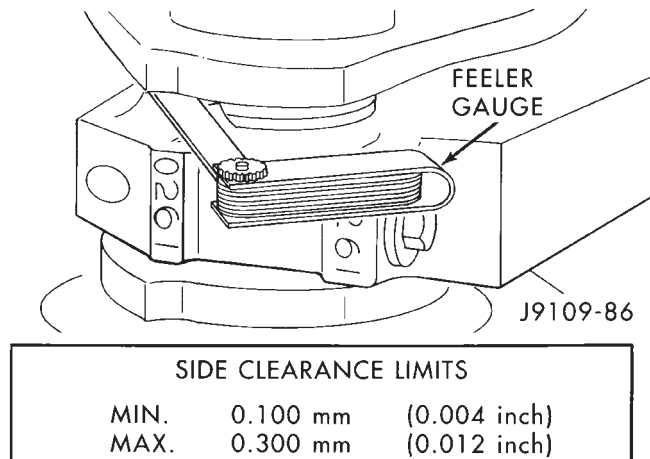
Side Clearance between Connecting Rod/Crankshaft
